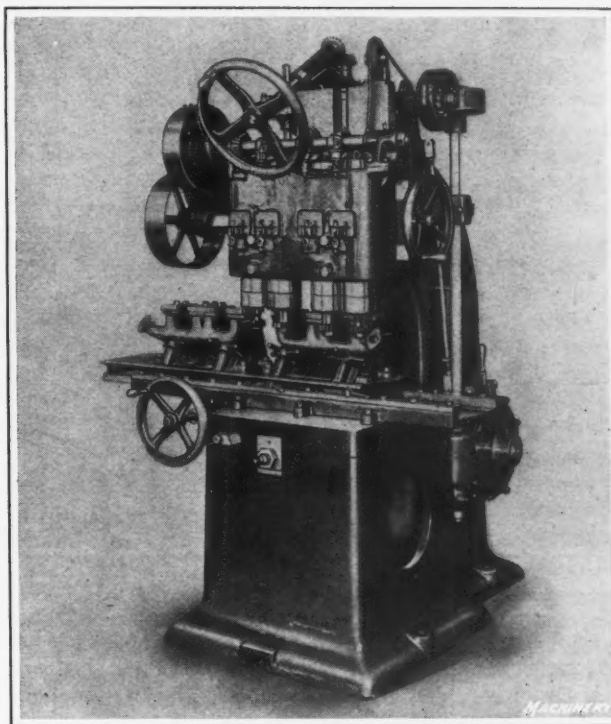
Four-spindle Machine engaged in milling the Under Sides of Manifold Bosses
